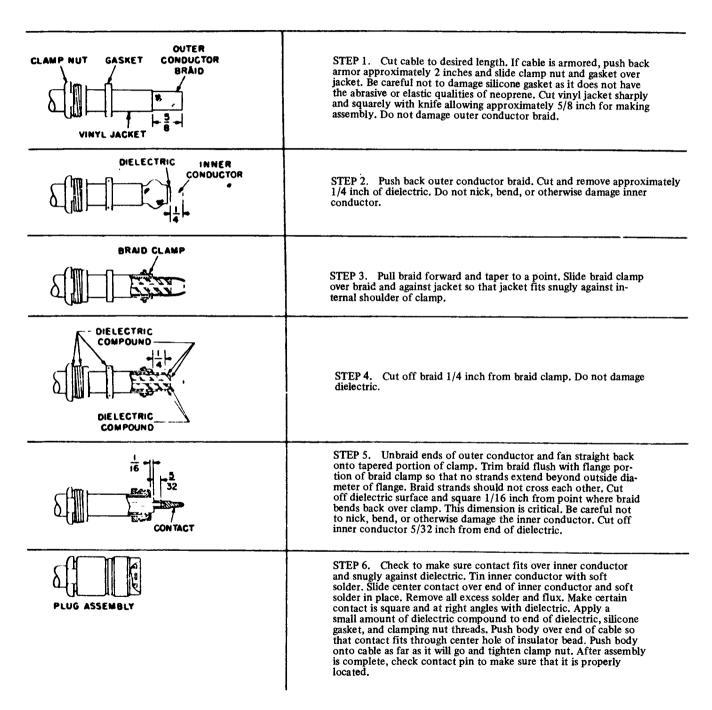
Attaching Plug UG-943A/U to Cable RG-10/U, Assembly Details
